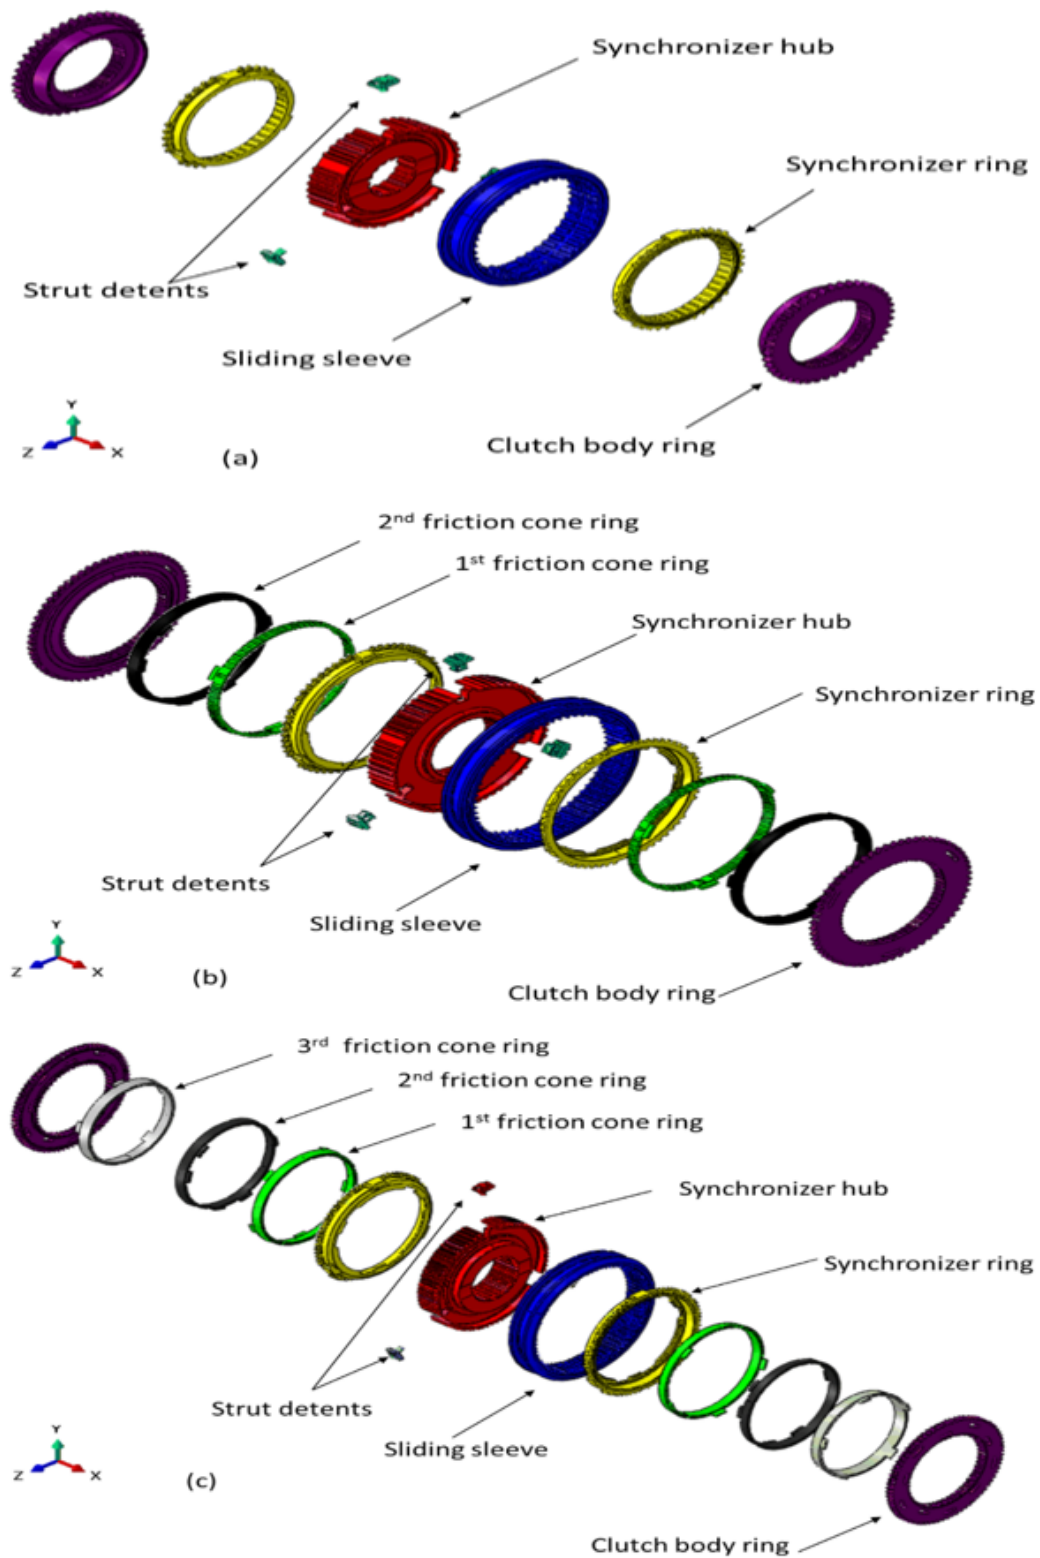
The different parts of (a) single cone (b) double cone and (c) triple cone synchronizers in the exploded view.
